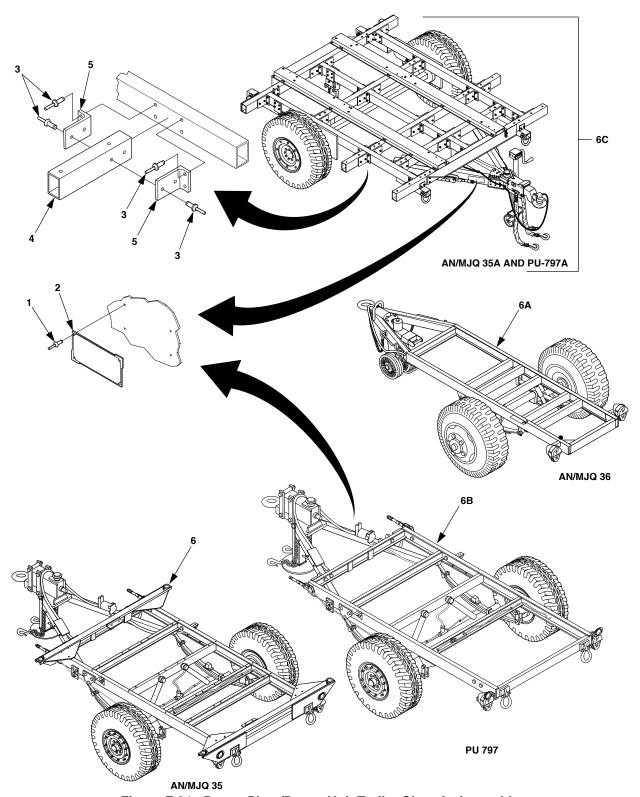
Power Plant/Power Unit Trailer Chassis Assembly.
